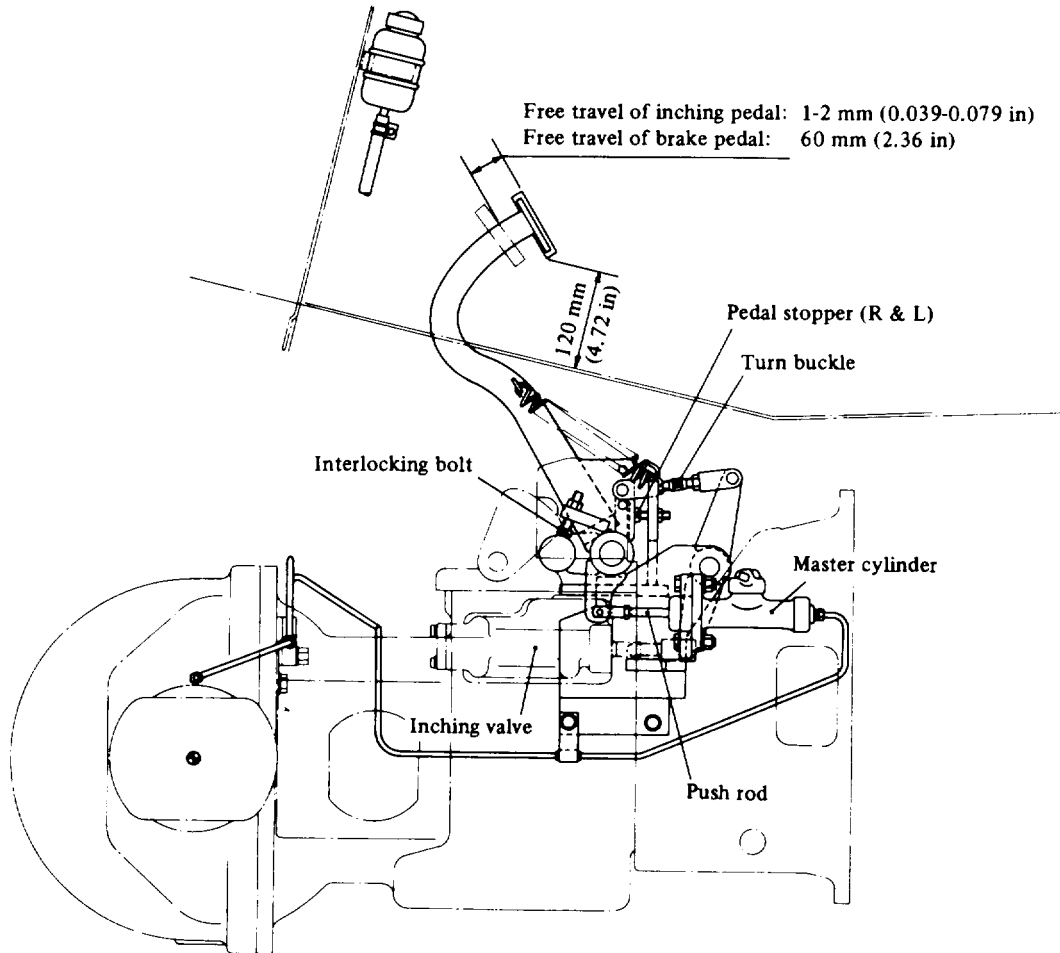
Brake Pedal Adjustment (Torque Converter Type Truck)
